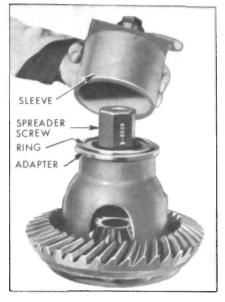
Installing Sleeve to Remove Bearing Outer Race
